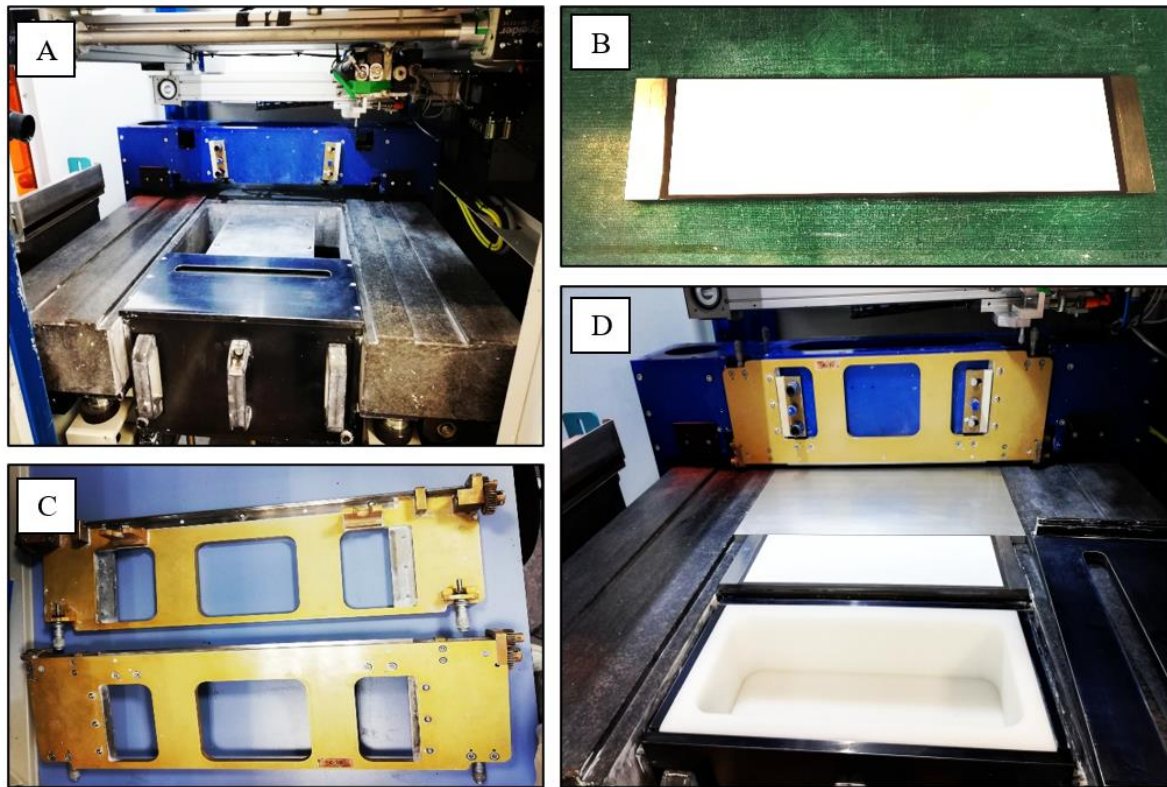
| Printer set-up where figure A shows the machine ready for the installation of blades (figure C) and building platform (figure B) with magnetic layer (grey) and adhesion-enhancing layer (white). In figure D is shown the machine after the blades and building platform installation and the empty paste tank.
